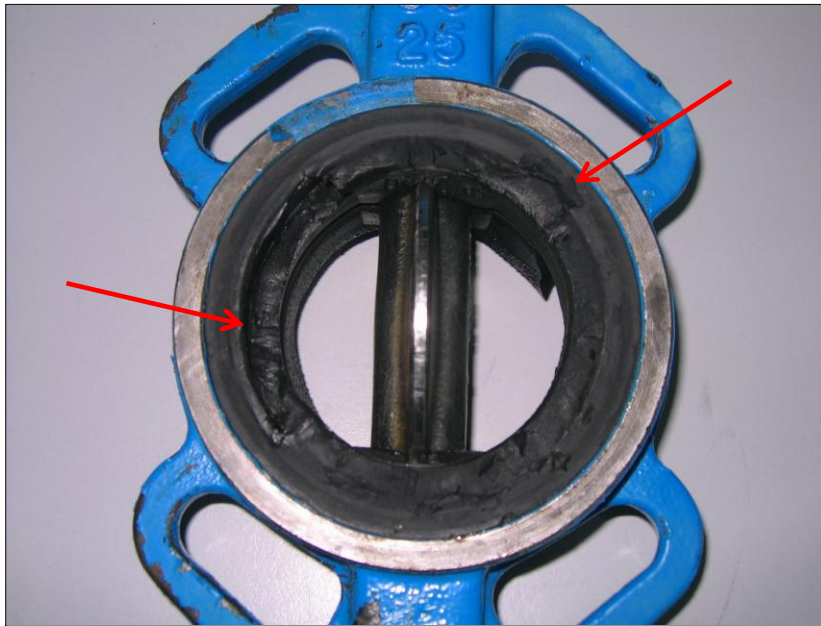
An example of a butterfly valve with a damaged seat due to erosion¹⁶.
